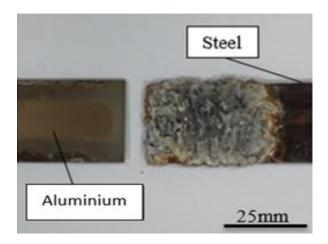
Failure location of brazed joint with 20 minutes wetting time after shear test.
